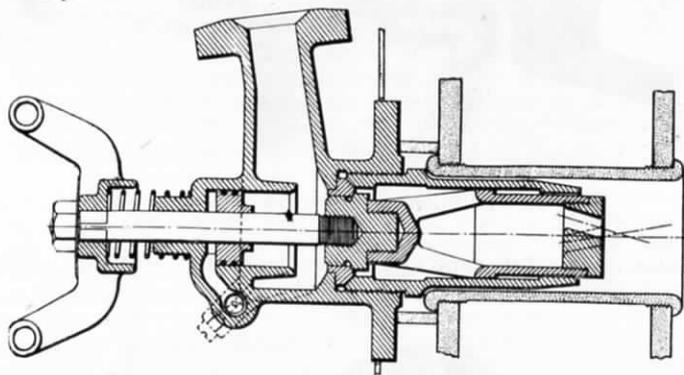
DETAILS OF DIAMOND SOOT BLOWER FOR LOCOMOTIVE BOILERS.
